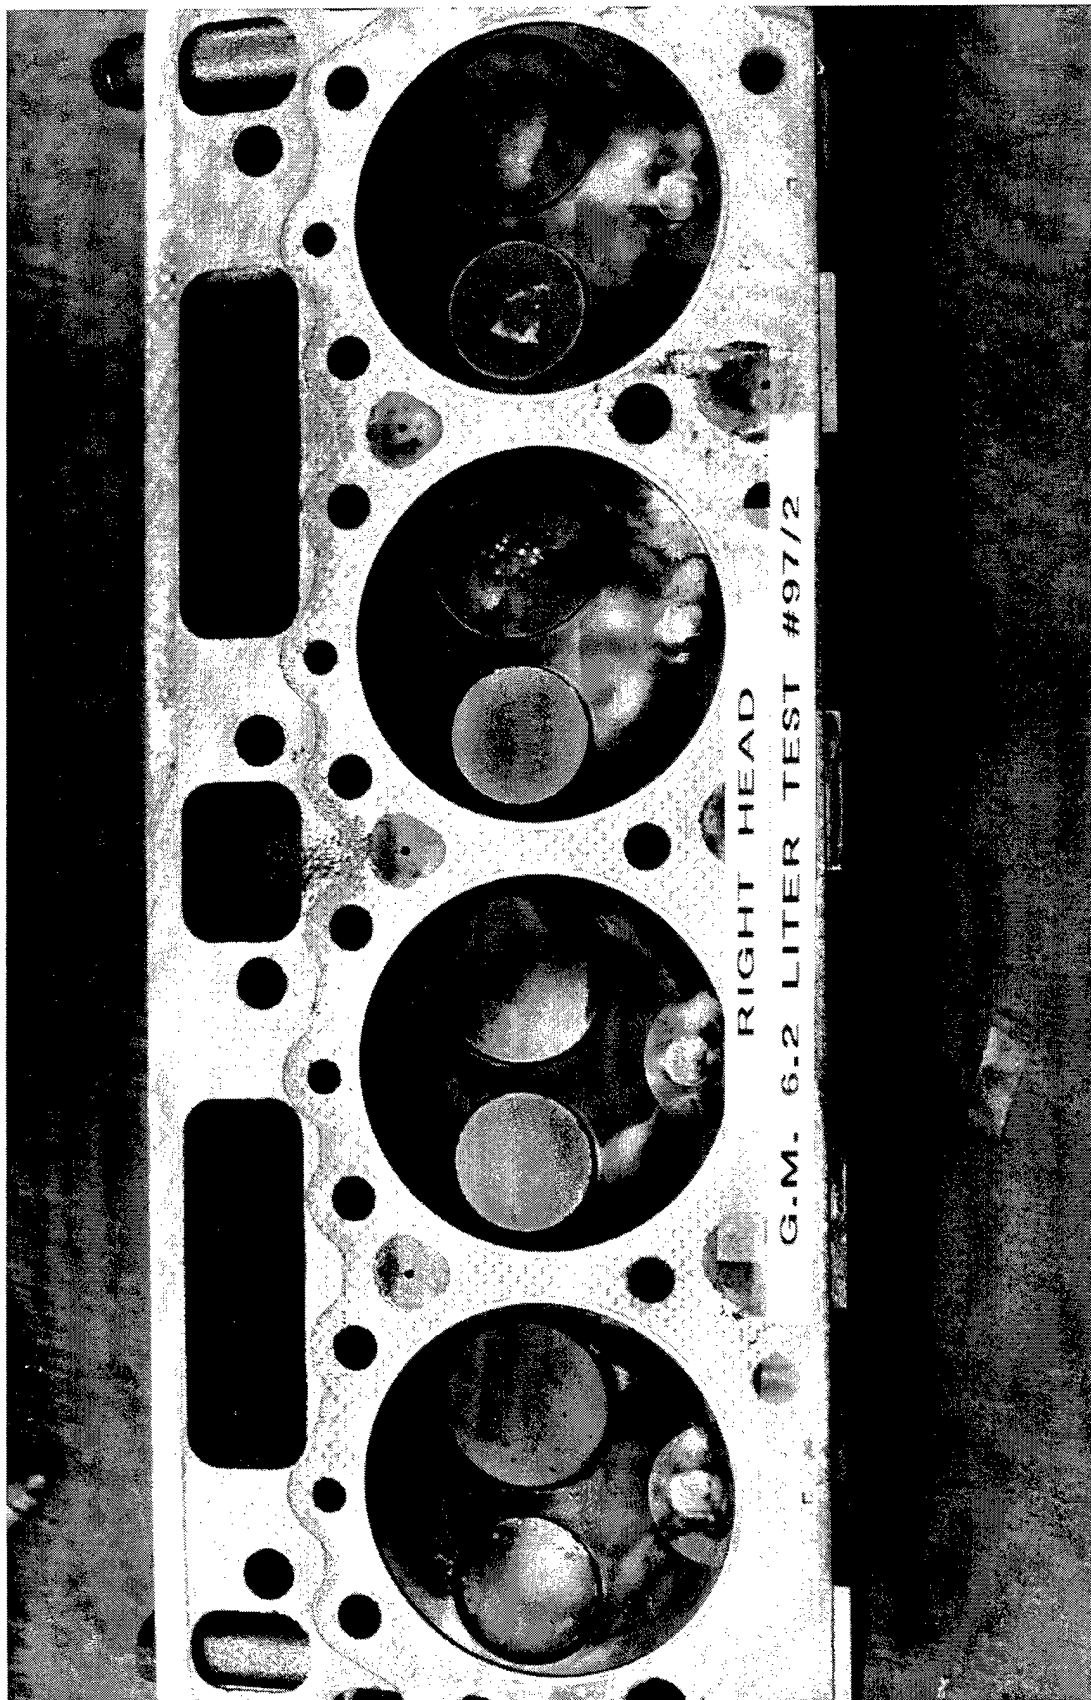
G.M. 6.2 Liter Test 97-2, Blended Fuel, Right Head
